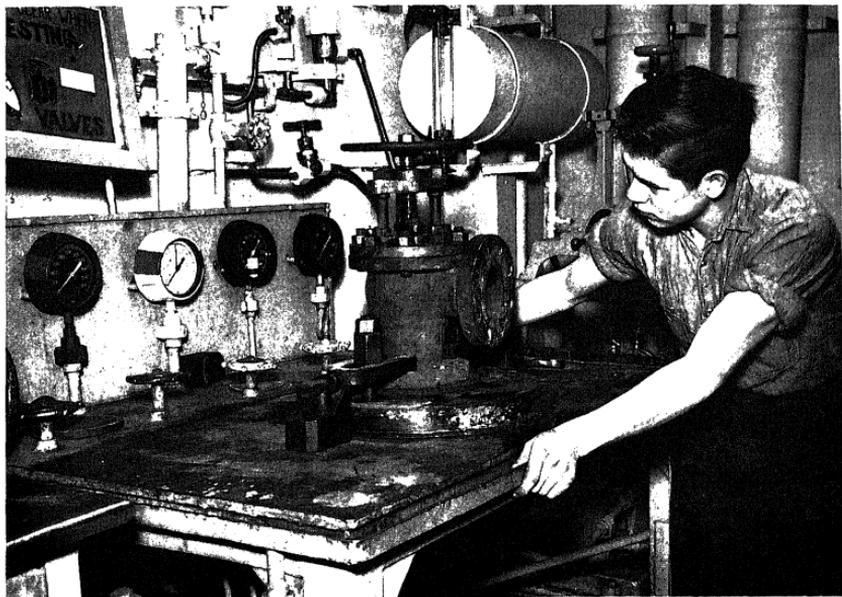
Applying a hydrostatic test to a high-pressure steam valve.
